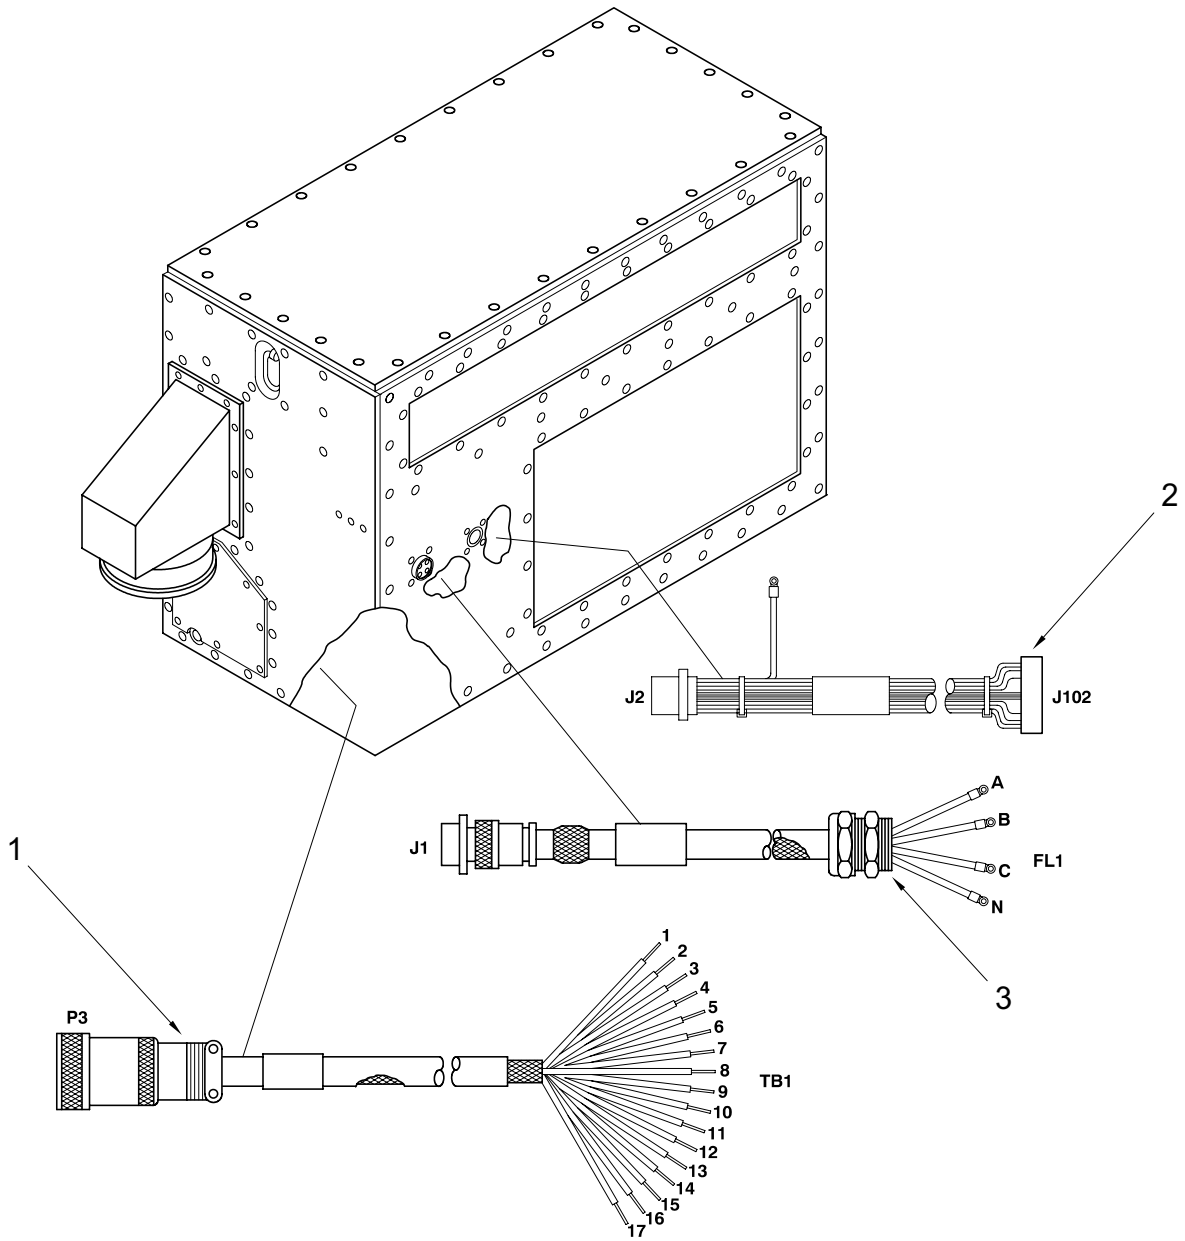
EVAPORATOR HARNESS ASSEMBLIES
